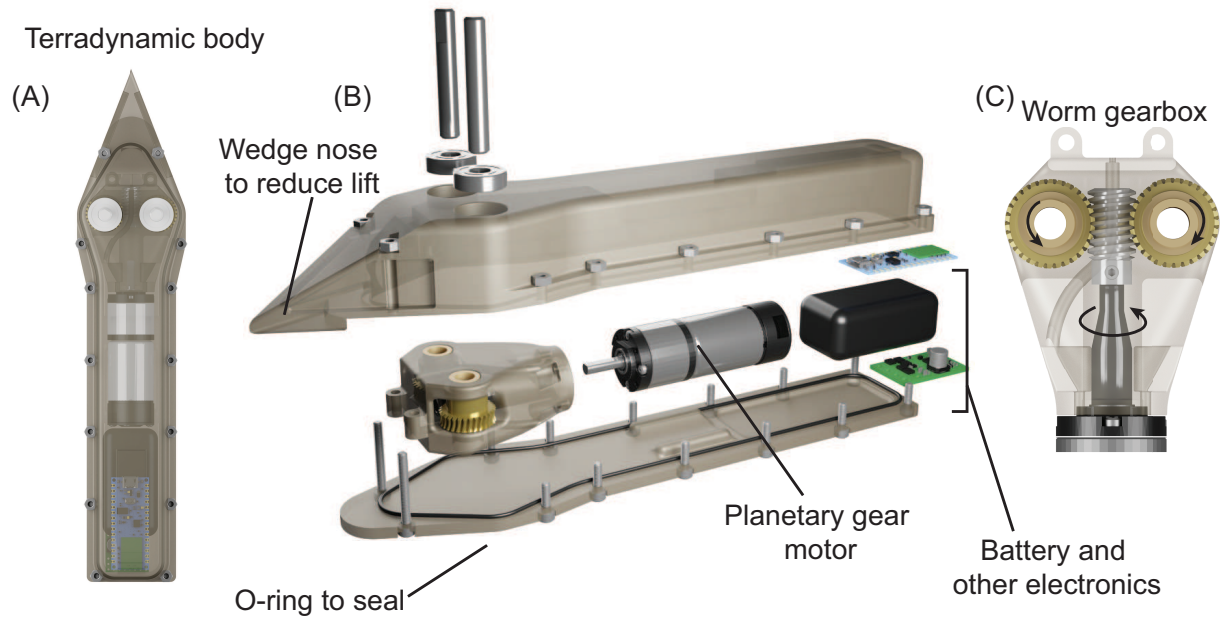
Robot design. (A) Top view of the terradynamic body for the robot. (B) Exploded view of the robot body assembly with different components. Planetary gear motor actuated both the appendages through a worm gear transmission. The robot was designed to be fully untethered with all the electronics encased in the body, fabricated using a resin 3D printer. An O-ring and two water-tight bearings were used to seal the body from sand and water. The appendages were driven by the motor through the two shafts attached to the gearbox. Wireless communication was done through a low-level messaging protocol (MQTT) through Wifi. (C) To keep the robot actuated by a single motor, a worm gear mechanism was integrated into a 3D printed gearbox.
